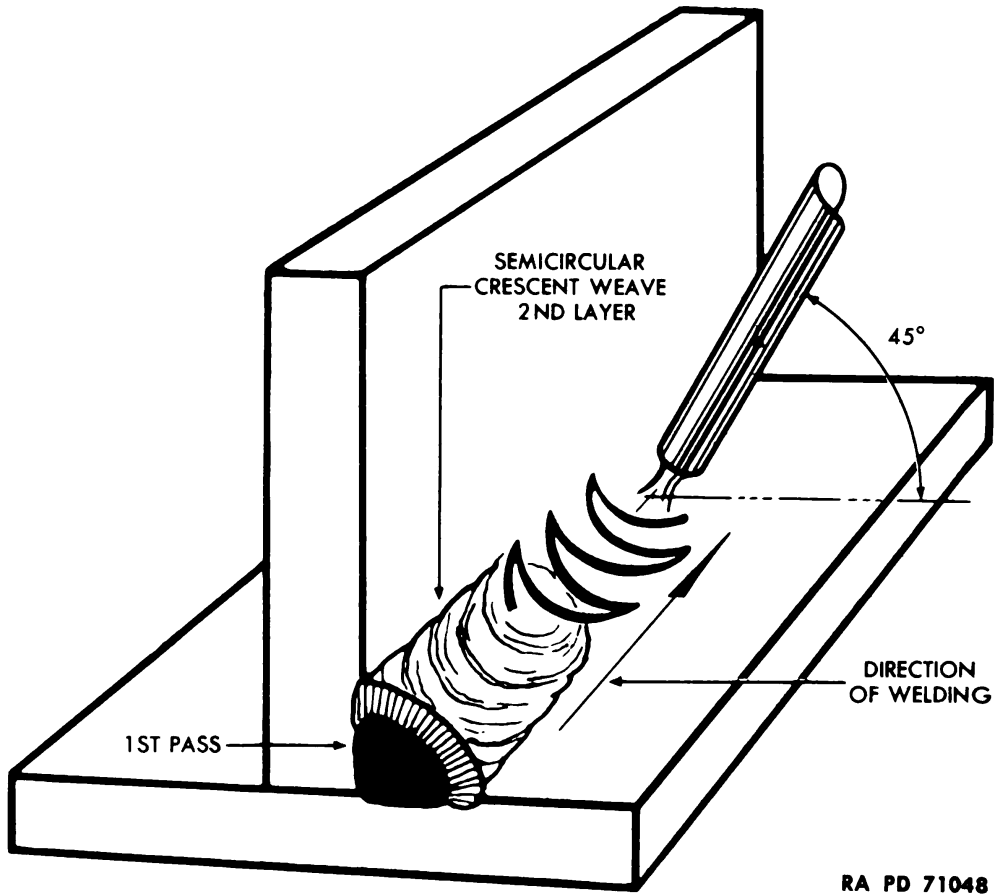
Weave Motion for Multi-pass Fillet Weld
